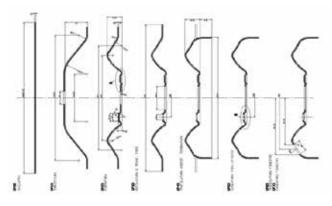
2D drawing scheme of the disc forming operations from a steel blank
